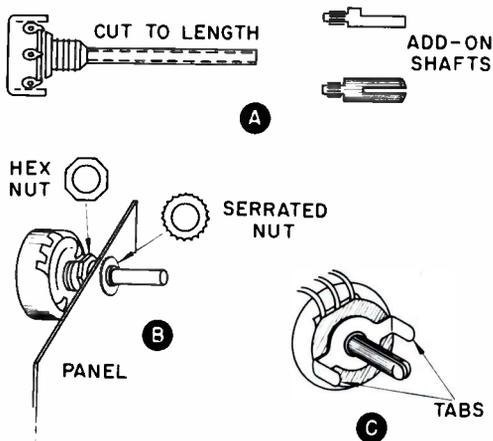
Potentiometer mounting: (A) Hollow extension shaft; (B) double-nut mounting; (C) twist-tab mounting.
